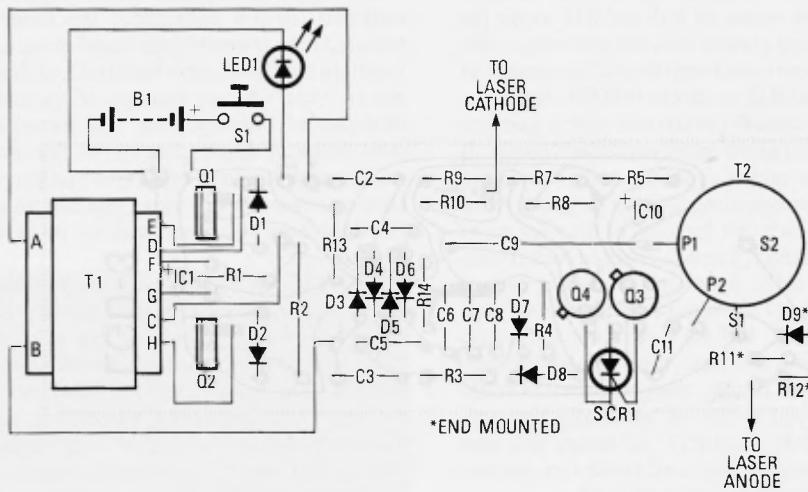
IF YOU CHOOSE to use the PC board provided in our PC Service section, use this parts-placement diagram.
